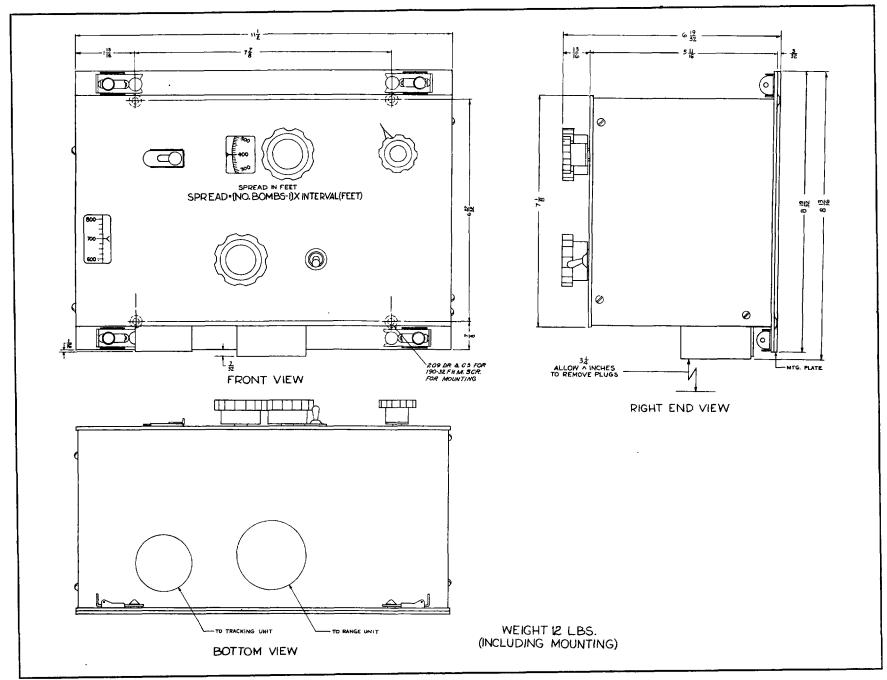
Control Box C-6/APQ-5—Outline Dimensions
